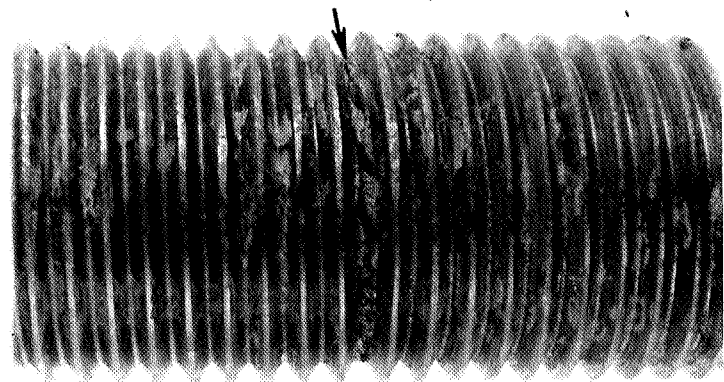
Close-up view of the long bolt illustrating a transverse crack (arrow) located approximately 1 in. from the fracture.
